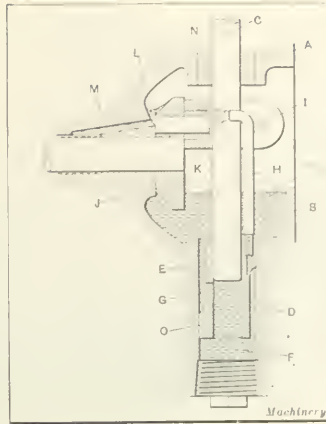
Cross-sectional View through Driving Mechanism, showing Forced Lubricating System
